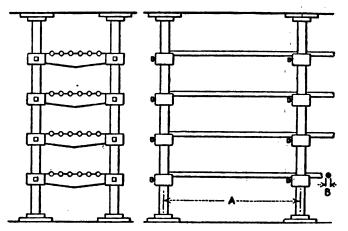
RACK OF BAR BRACKET AND ROD CONSTRUCTION (For safe load on bar columns, see Fig. 2)
